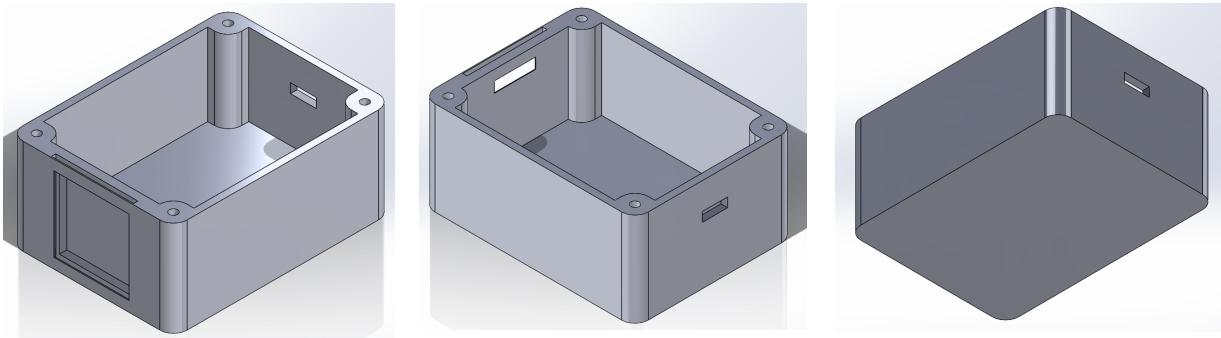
a) Front view of resized housing b) Back view of resized housing c) Bottom view of resized housing
